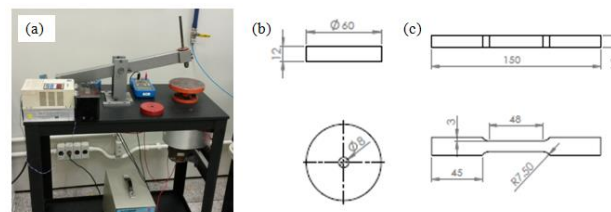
Tests implementation. a) Pin-on-disk equipment; b) Disk dimensions; c) Tensile test sample dimensions.
